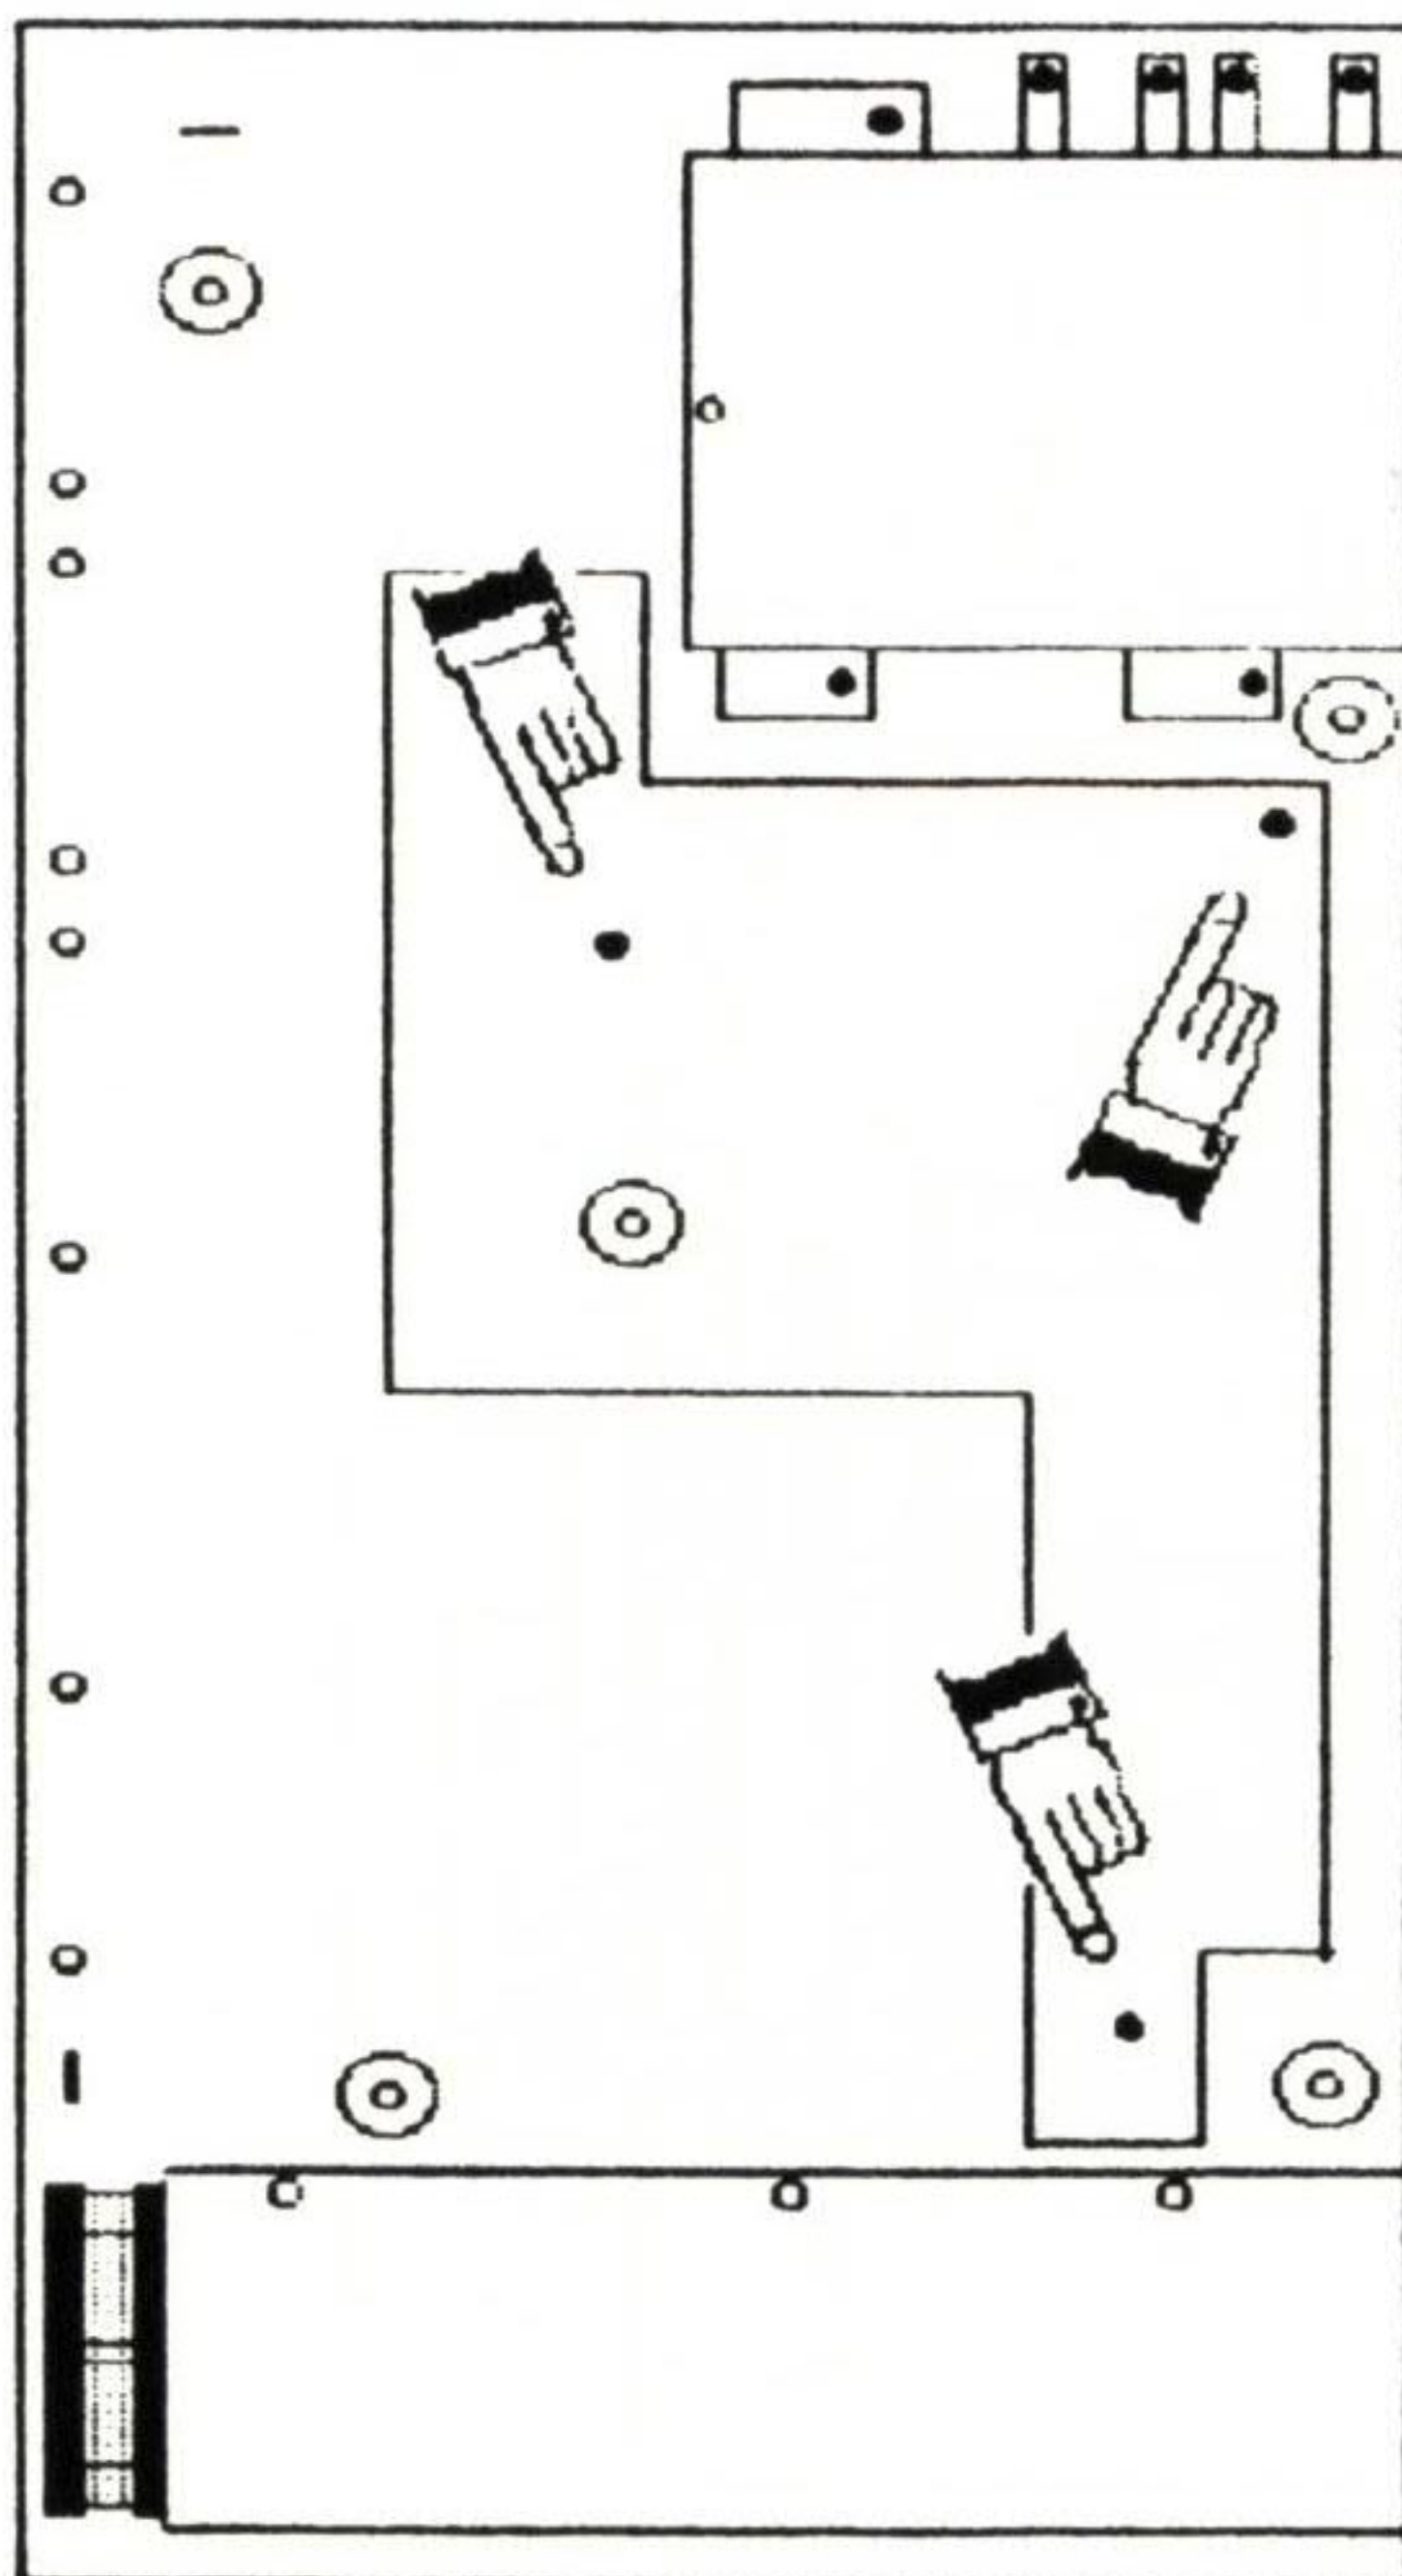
The Amiga with metal shielding removed, showing locations of WCS board screws
